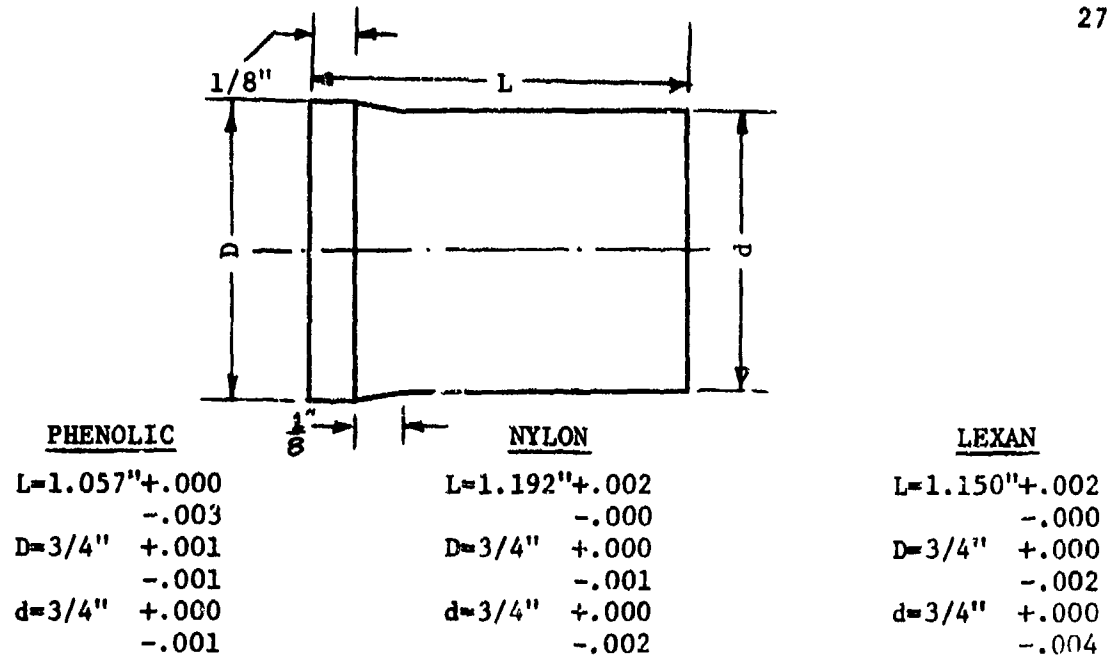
(a). Ten gram projectiles used with 3/4" launch tube
